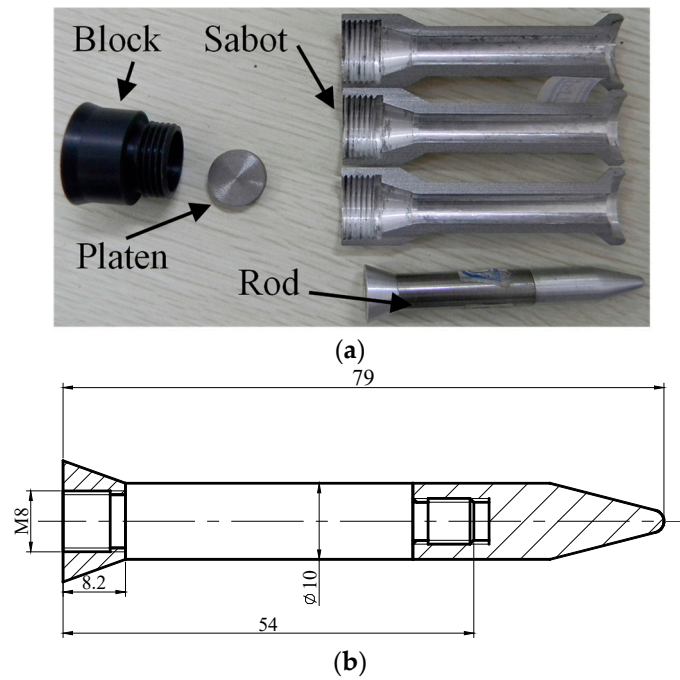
(a) Expanded view of projectile and (b) dimensions of rod.
